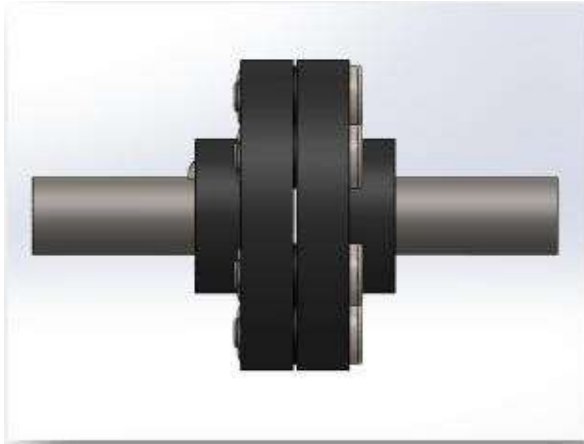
Front view of CAD model of bushed pin flexible coupling
